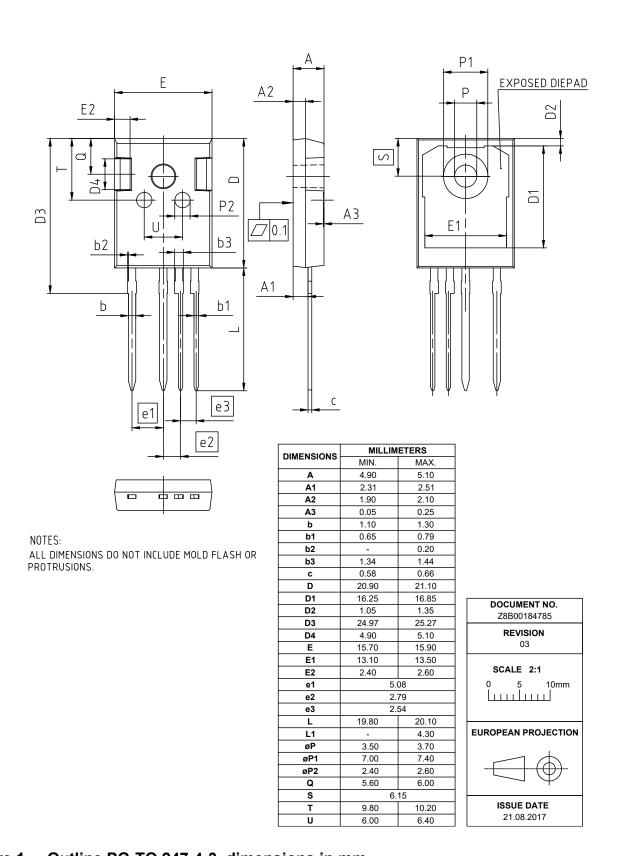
Outline PG-TO 247-4-3, dimensions in mm
